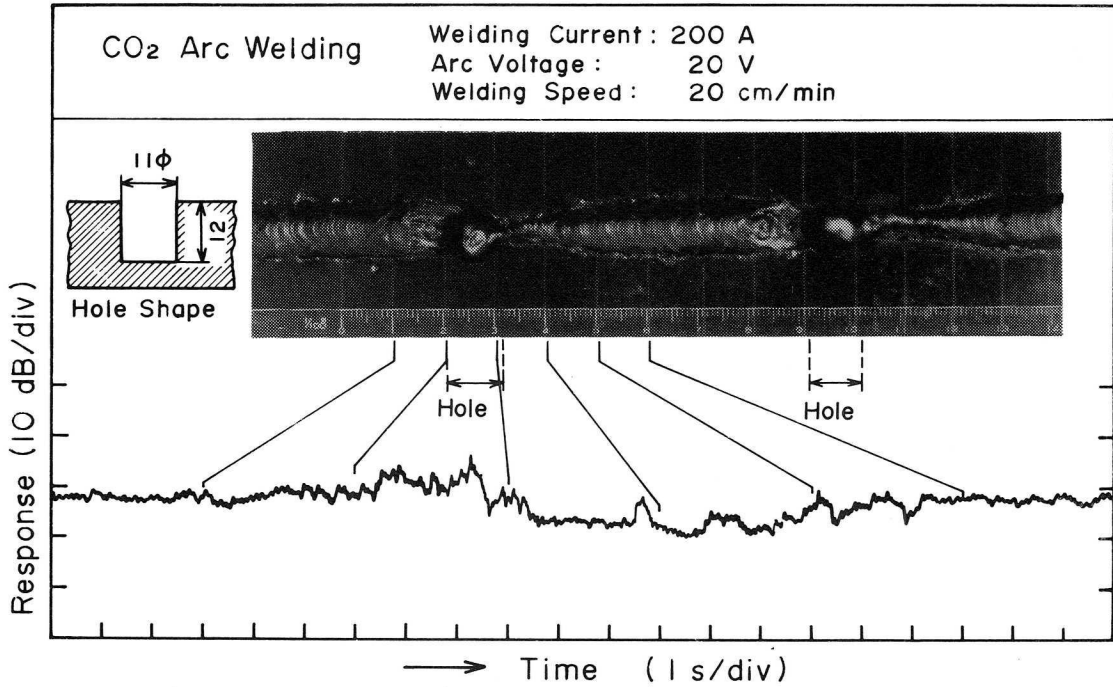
Example of hole detected by arc sound in CO₂ arc welding. (hole diameter : 11mm)
